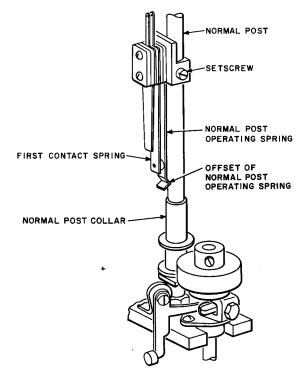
Normal Post Spring Assembly Operated by Normal Post Collar
